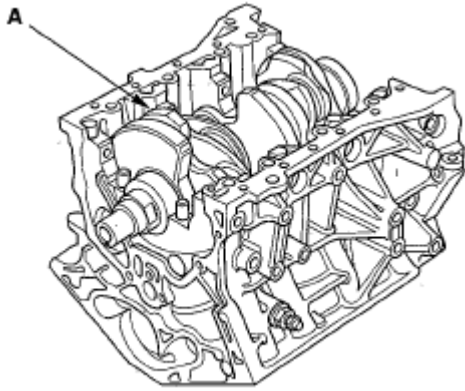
Identifying Lower Crankshaft Into Engine Block
